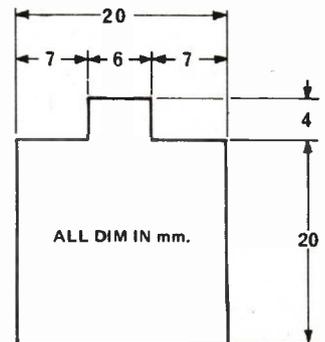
Dimensions for the IC heatsinks. One is soldered to each side of the IC — to pins 3, 4, 5 and 10, 11, 12.
